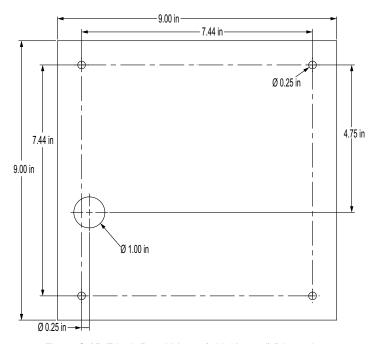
7 Inch Panel Mount (with Keypad) Dimensions
